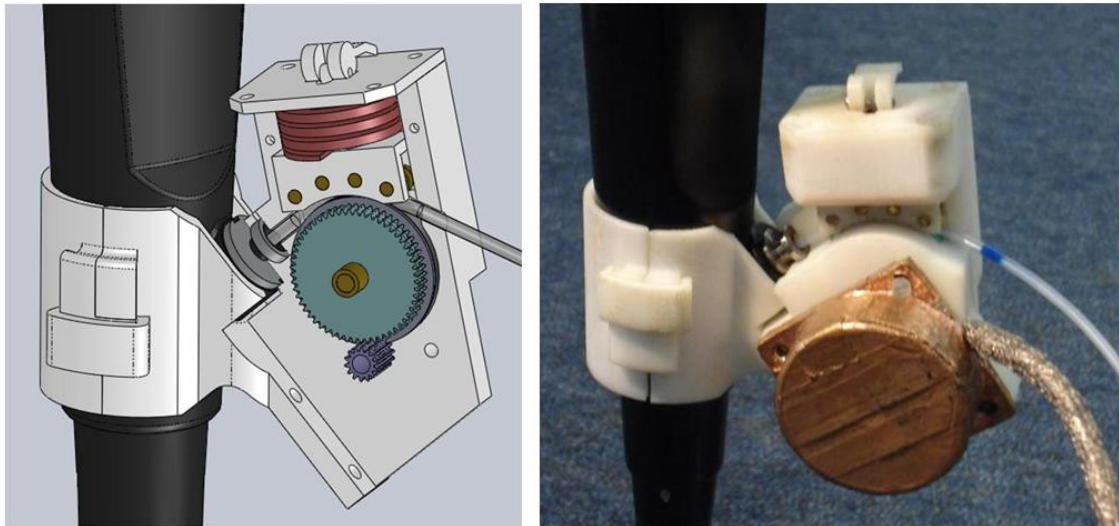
Catheter feed module showing internal load transfer parts and geartrain (left) and prototype mounted on duodenoscope handle (right).
